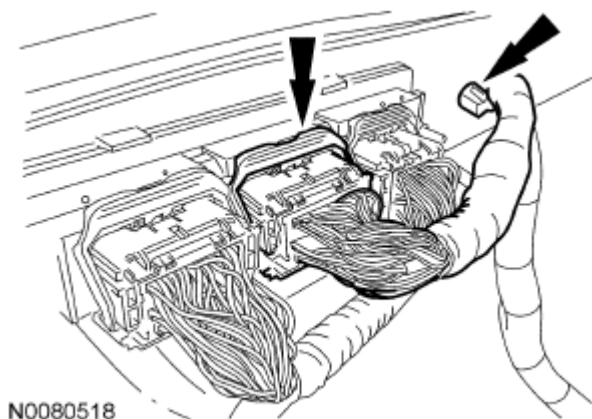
Locating PCM Electrical Connector And Wire Harness Retainer
